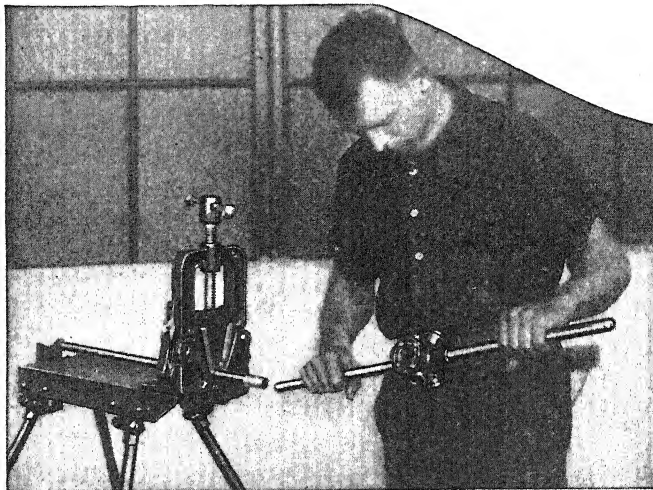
The Toledo Three-Way Hand Threading Pipe and Conduit Die Holder Used in Cutting a Long Running Thread on a 3/4-In.-Dia. Conduit.
